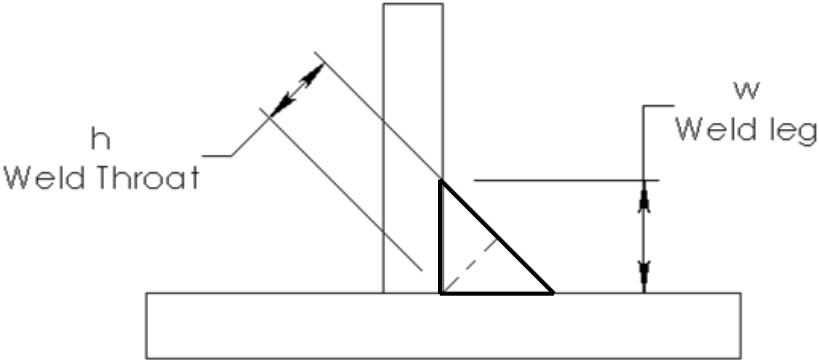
Reference figure for stress analysis showing weld parameters
